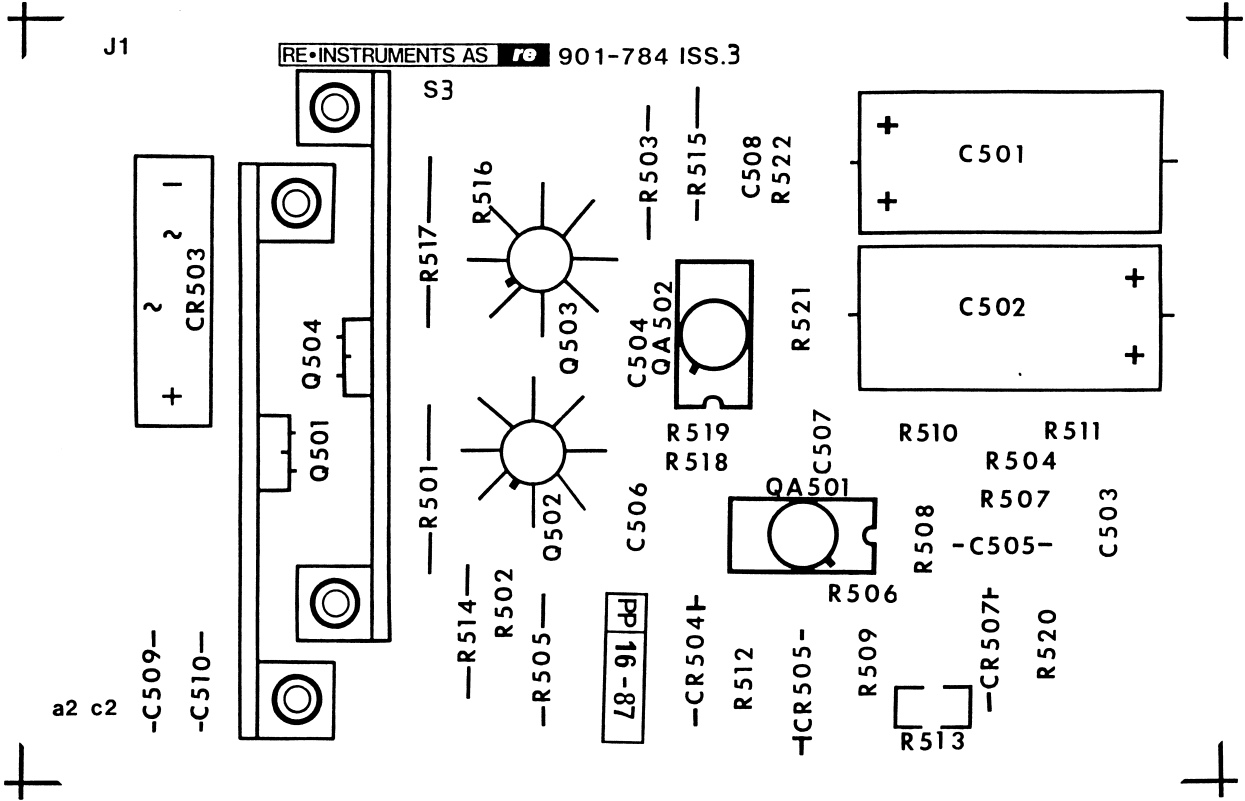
J1 Power Supply Printed-Circuit Board, Code 901-784
